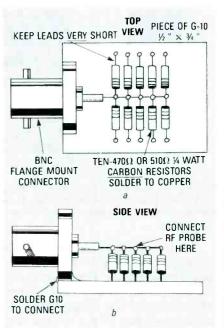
A DUMMY LOAD SHOULD BE USED while adjusting the power output.
